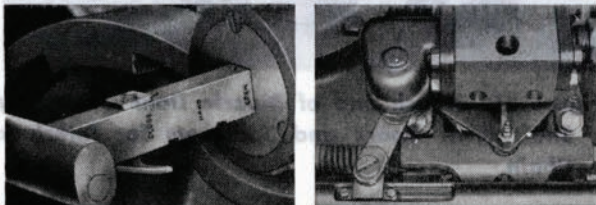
Power-Operated Muzzle Door Mechanism Controls—Muzzle Door Open—Control Valve Operating Handle at OPEN (Left) and Control Valve Arm Toward Breech (Right).
